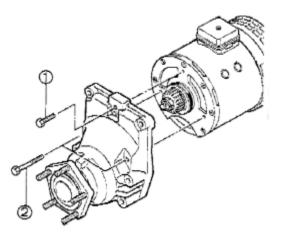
NOTE: Take care when removing motor from transmission box.
